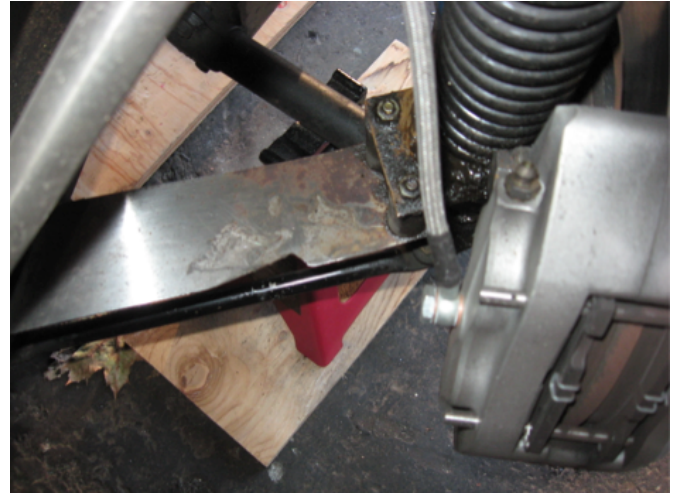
RHS. Picture shows flattened edges after grinding the RH caliper bracket.
